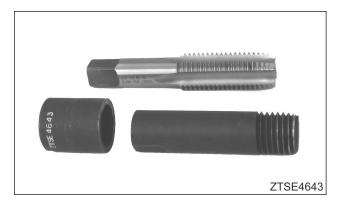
Injector Sleeve Remover, ZTSE4643-1A
